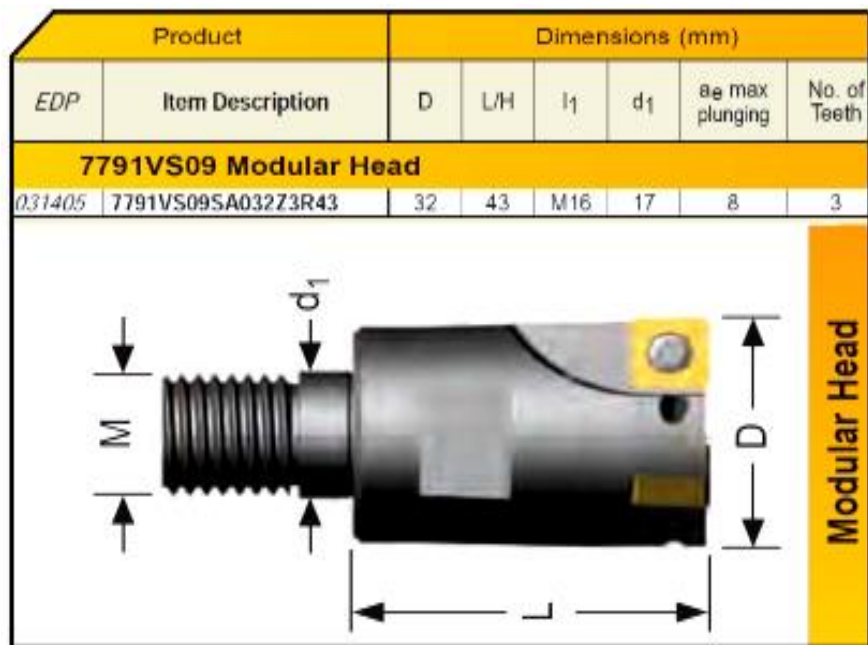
Milling tool and carbide insert X400 (Kennametal)
